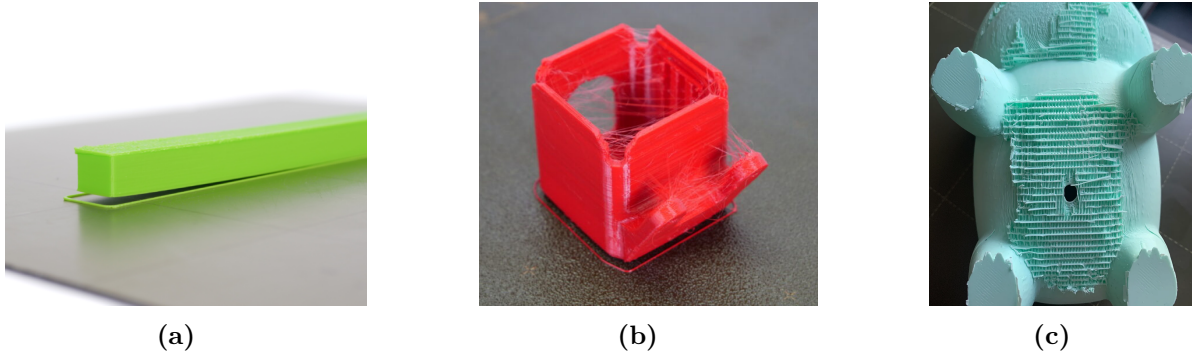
Examples of commonly encountered 3D printing issues: (a) Warping [74], (b) Stringing [75], and (c) Hard-to-remove grid supports [76].
